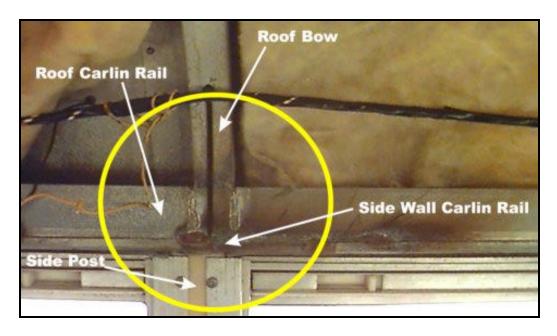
Locations of Roof and Window Components which are Welded Together
